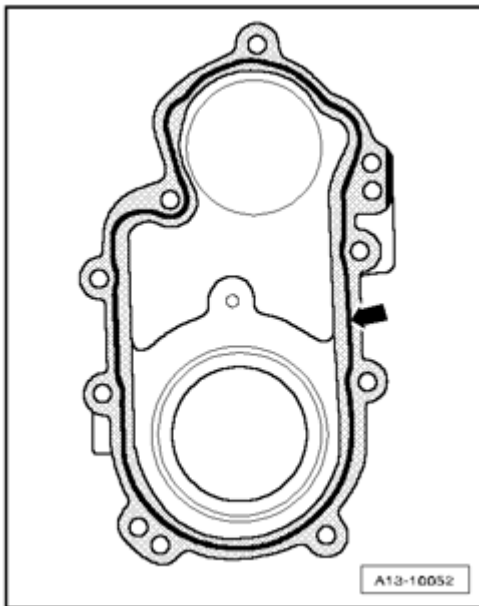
Applying Bead Of Sealant To Clean Sealing Surface Of Sealing Flange
